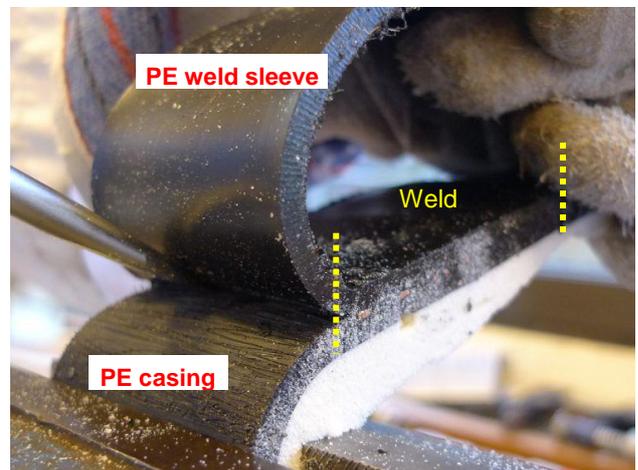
The weld is strong enough to withstand manual peeling.
